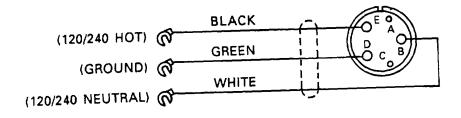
Power Cable Assembly for AN/TLQ-15 on Reel Unit RL-260
